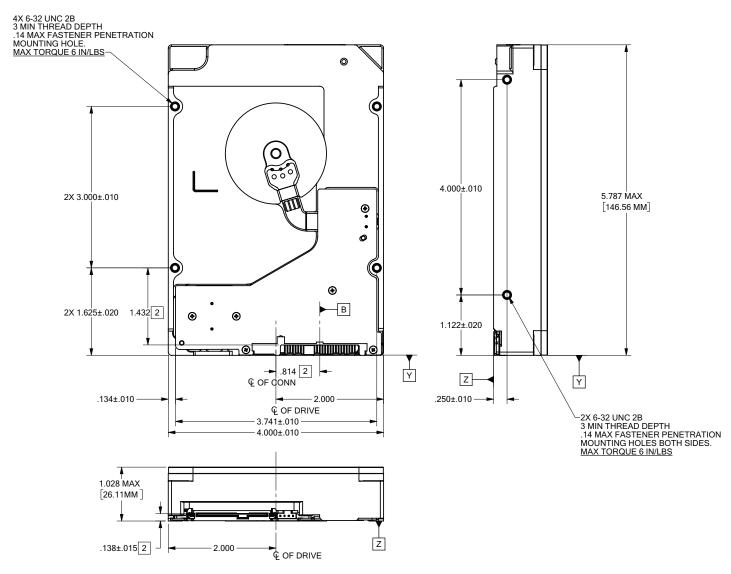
Mounting configuration dimensions for 12TB & 10TB models
